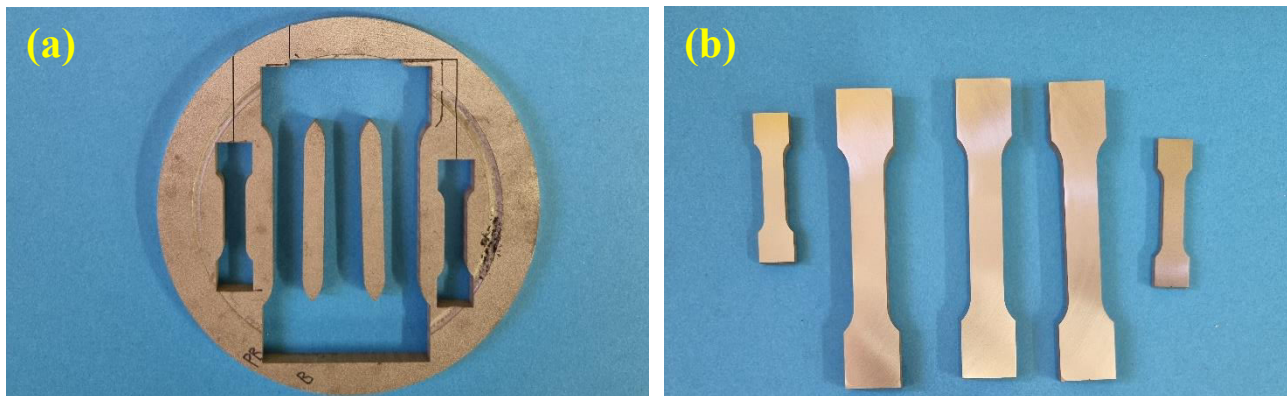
(a) Piston blank with specimens removed, (b) specimens after the polishing
